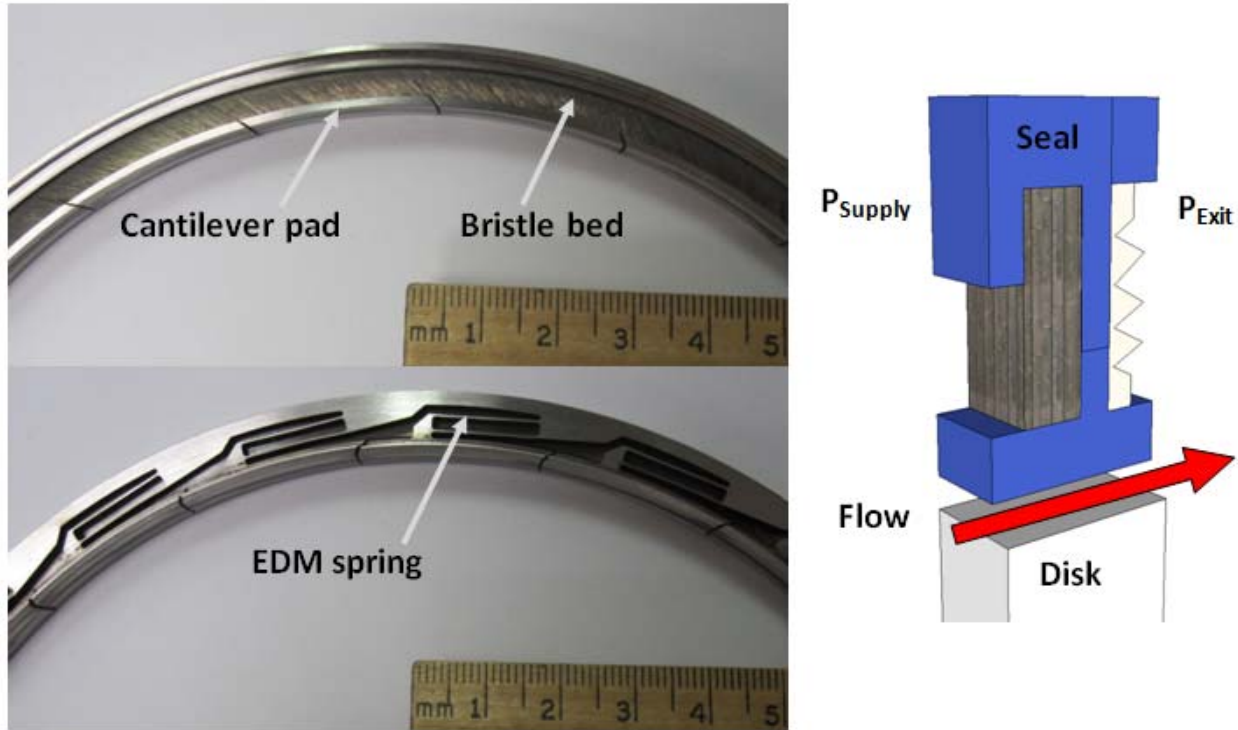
Inner side view of a hybrid brush seal and schematic view of thru flow
